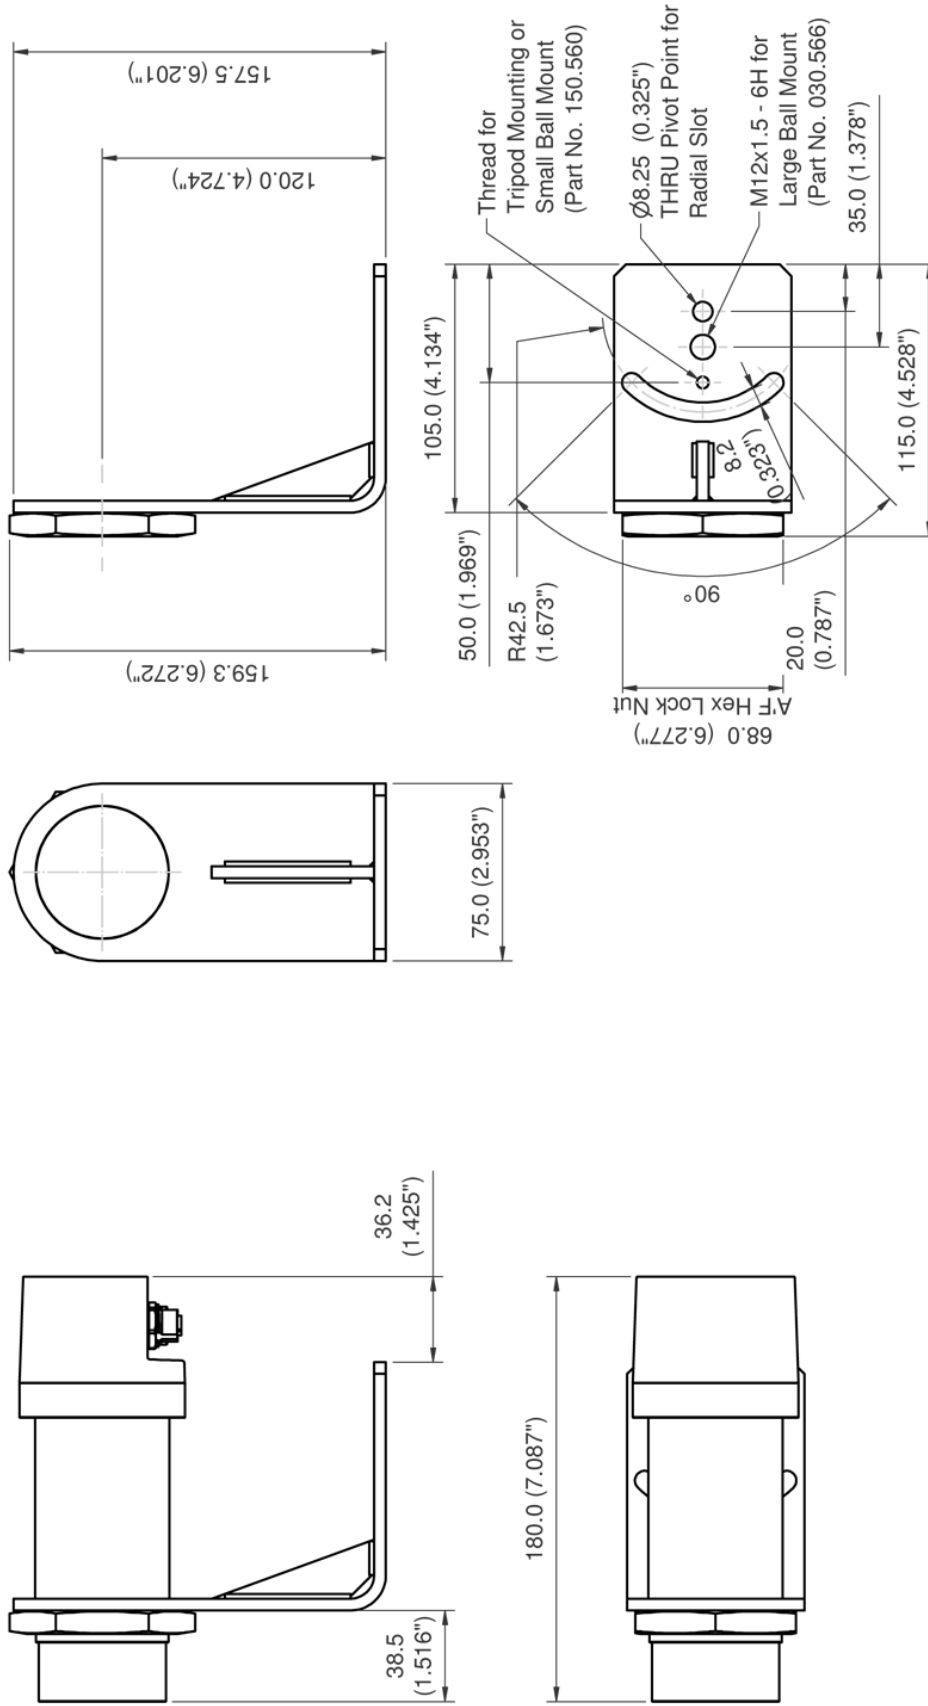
SPOT Angle bracket Installation Dimensions
